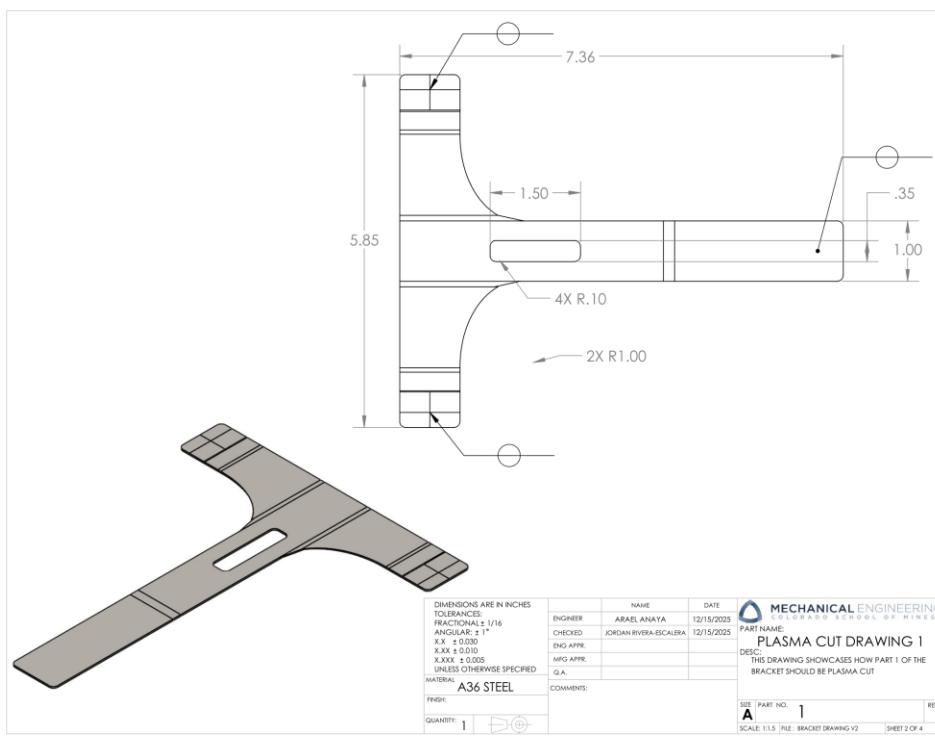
Part 1 Plasma Cut Drawing
